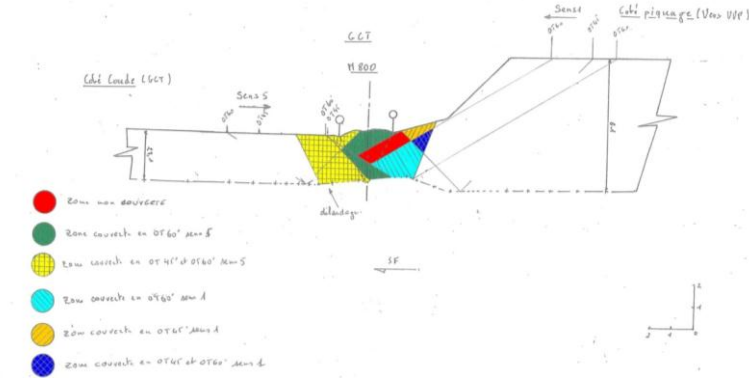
Example of an MSL for which a full volumetric inspection could not be achieved
